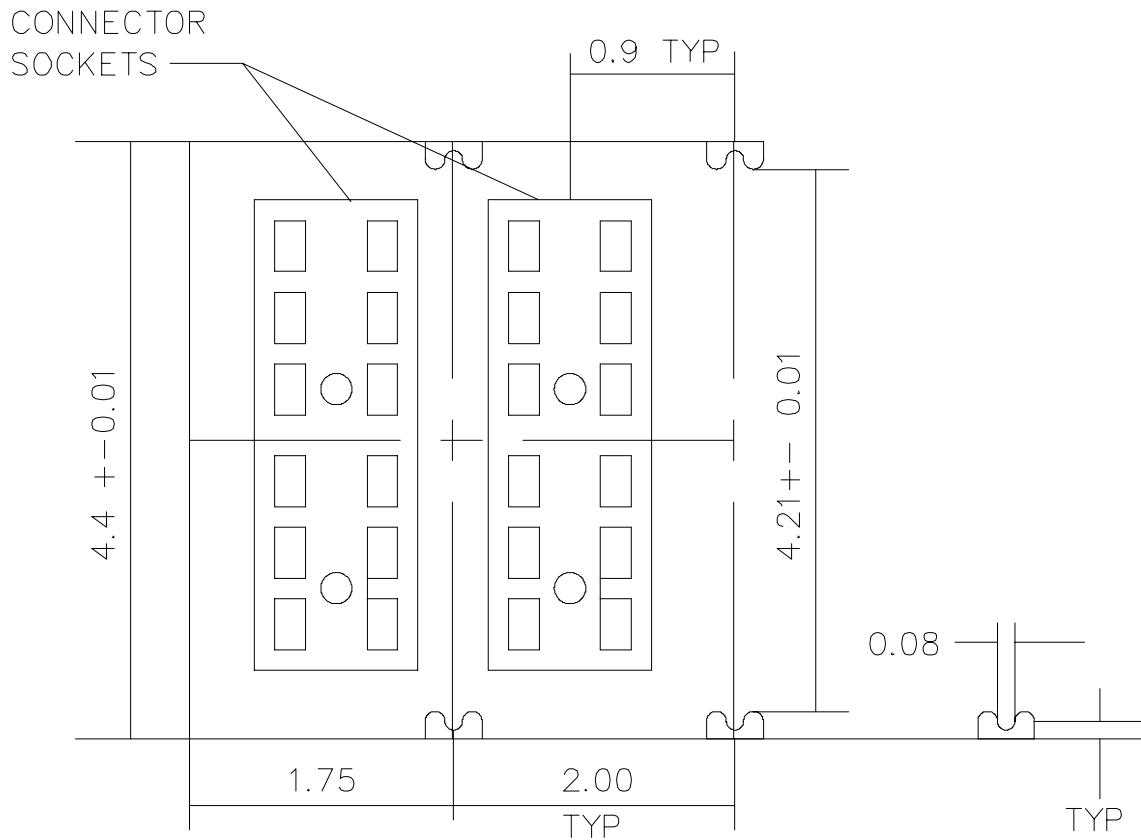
SWITCH PACK MOUNTING DETAIL
